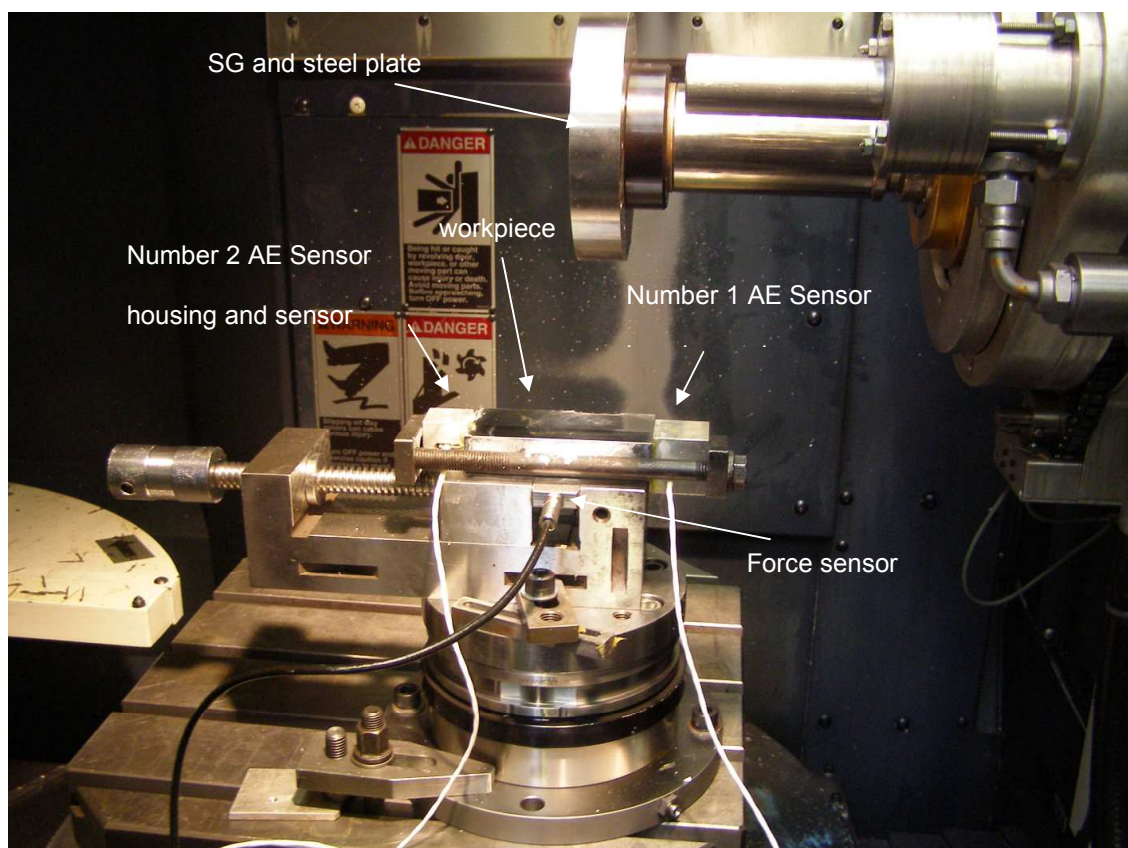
Makino A55 grinding centre machine set-up for horizontal SG scratch test
